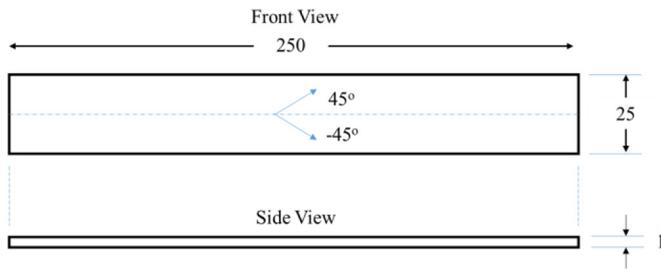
$\pm 45^\circ$ tensile test specimen's nominal dimensions.
